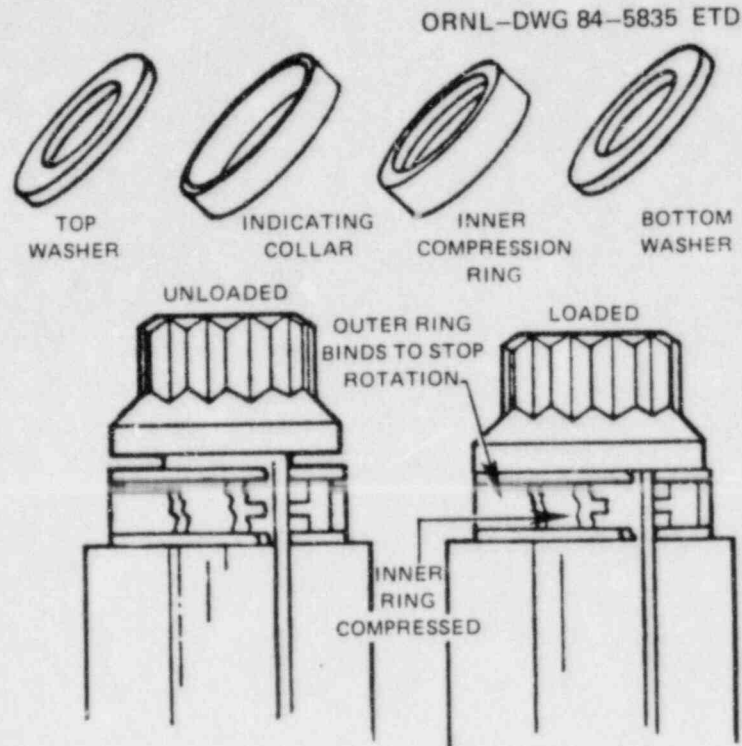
Load-indicating washer with indicating collar that is free to rotate until proper preload is applied.
